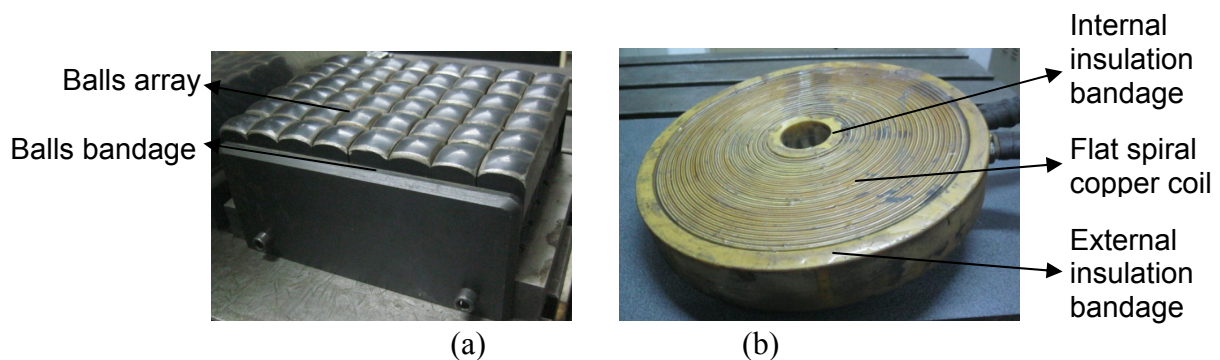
Ball pad mold (a) and Electromagnetic coil (b)
